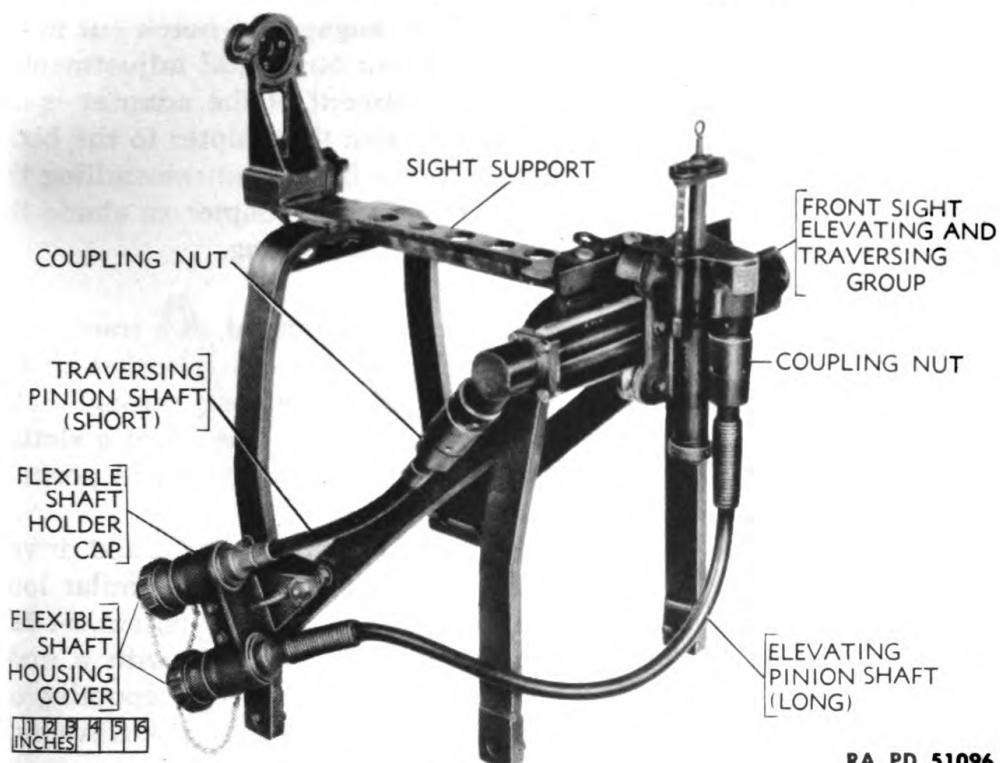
Front and Rear Sight Groups Mounted on Sight Support – Right Side View – A.A. Machine Gun Mount, Cal. .50, M2
